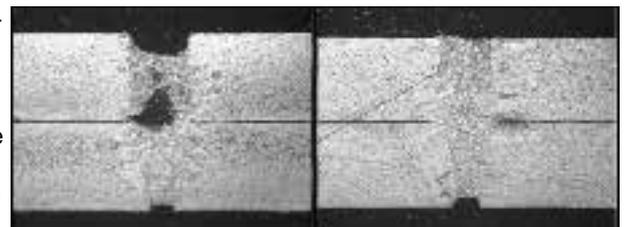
Overlap welded zinc-coated steel. (Left) Welding without laser removal of the coating showing clear evidence of porosity. (right) A high quality weld produced after laser removal of the zinc coating.
